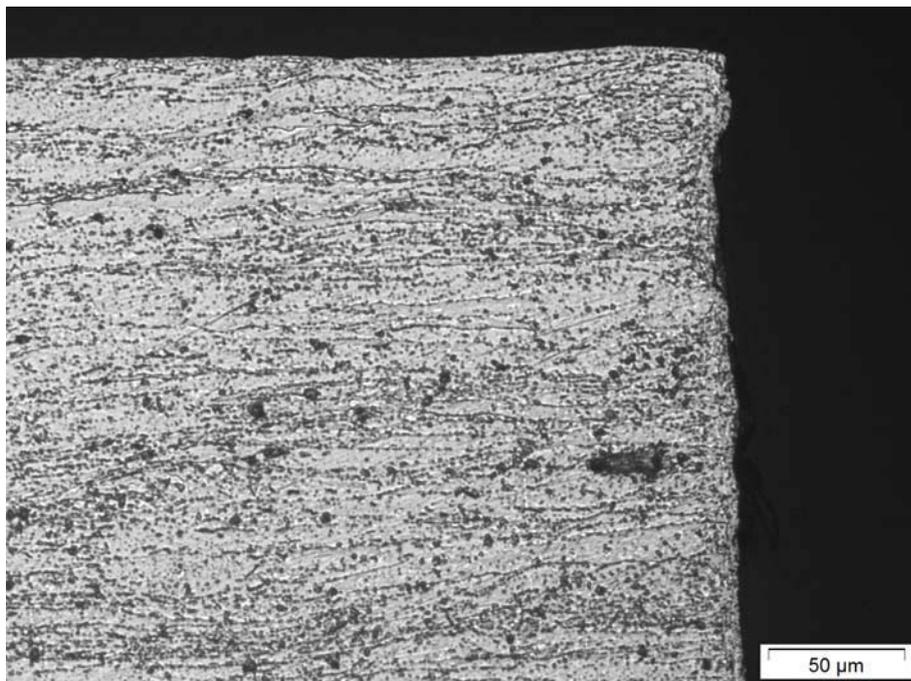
Etched cross-section view of hole exit edge, Drill D, zoomed on Figure 8.24.
